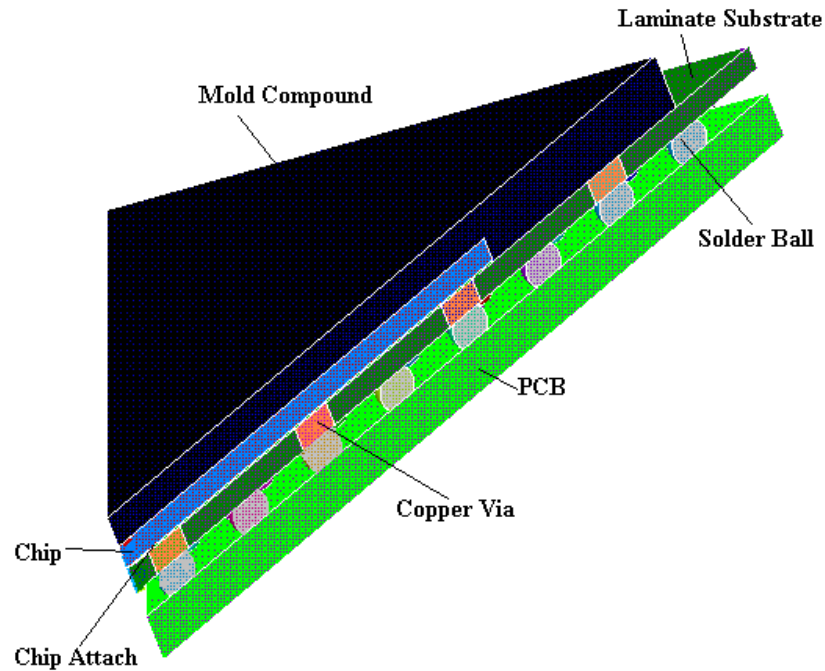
The 1/8th simplified PBGA layout for modeling consisting of; copper vias, 63Sn/37Pb solder balls, chip attach material, silicon chip, mold compound material, and PCB.
